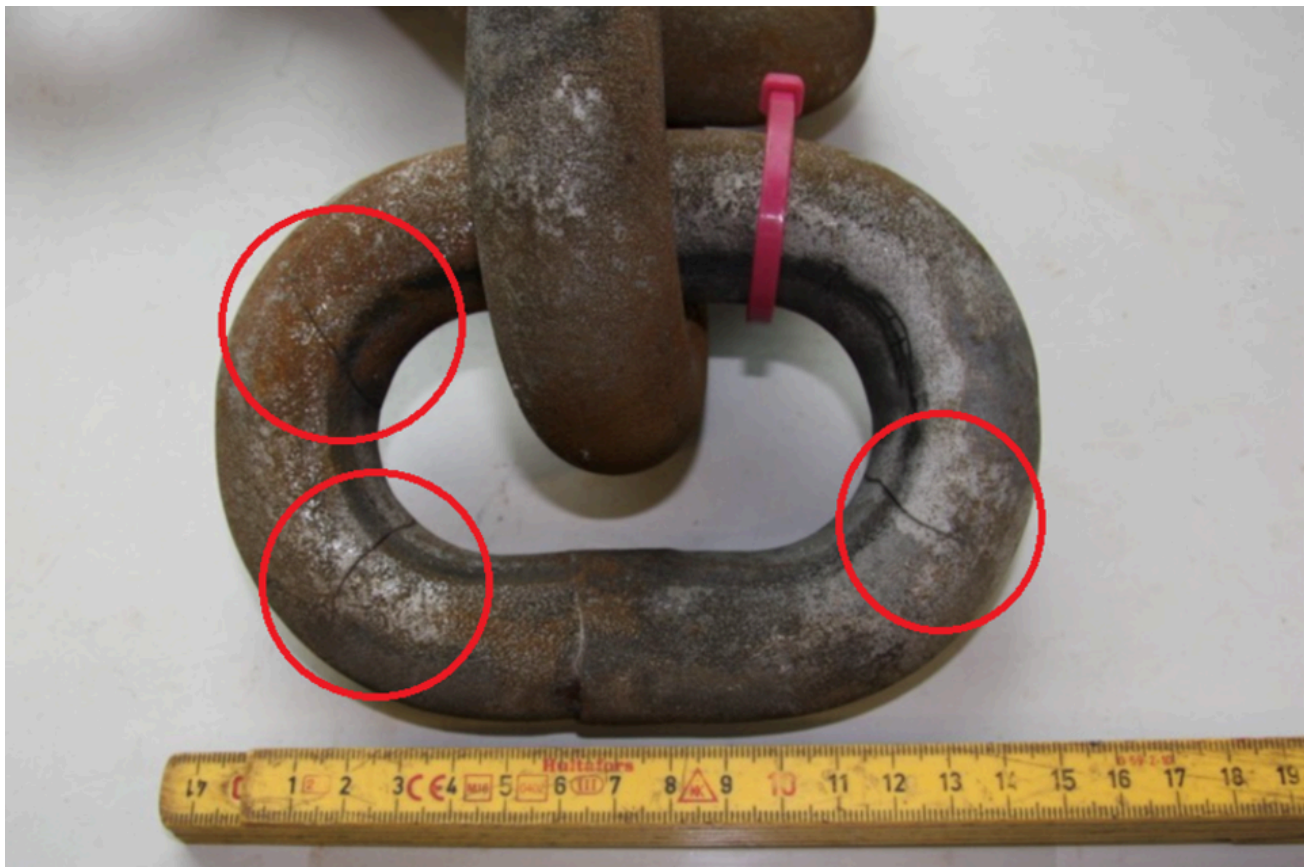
A chain link used in the lifting equipment of a fishing vessel showing fractures identified during inspection.
